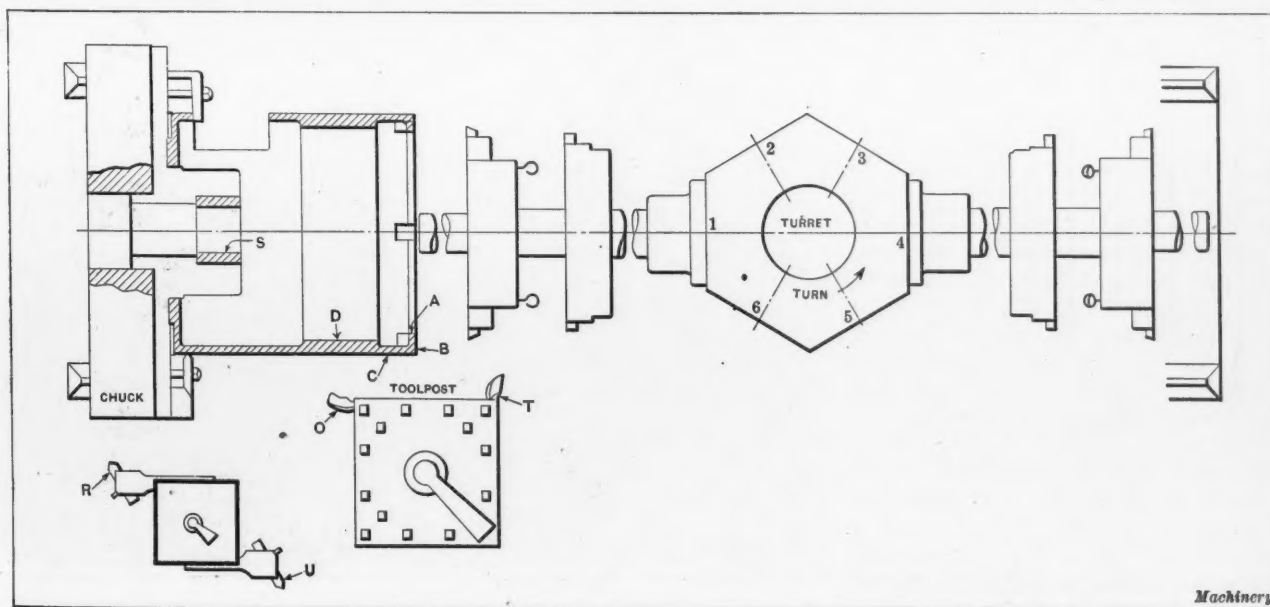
Tooling Equipment for Second Operation on Motor Frame shown in Fig. 24
